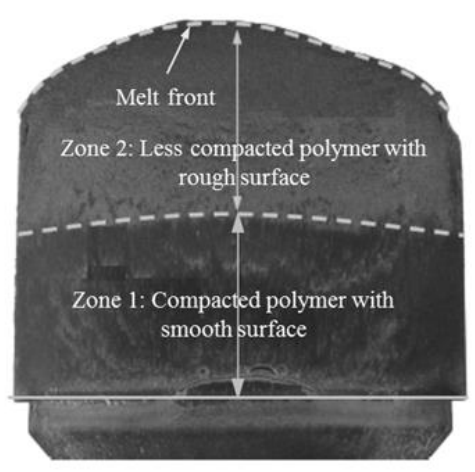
Mold filling study of thermoset phenolic injection molding compounds [28]
